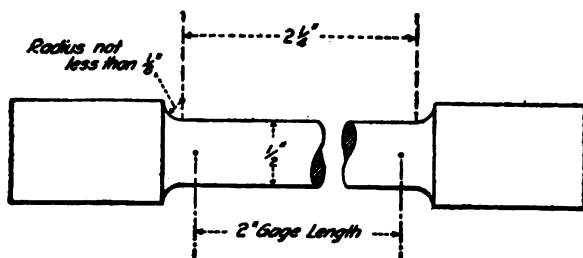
Form and dimensions of test specimen for tension tests of pins, rollers, and bars more than $\frac{1}{4}$ inches thick.
